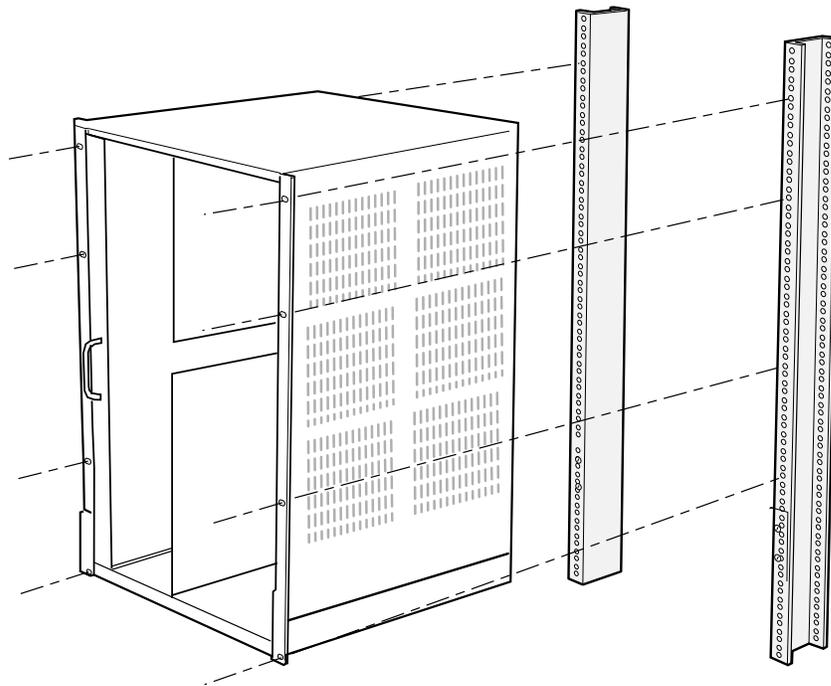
Installing the RS 8600 chassis in an equipment rack
